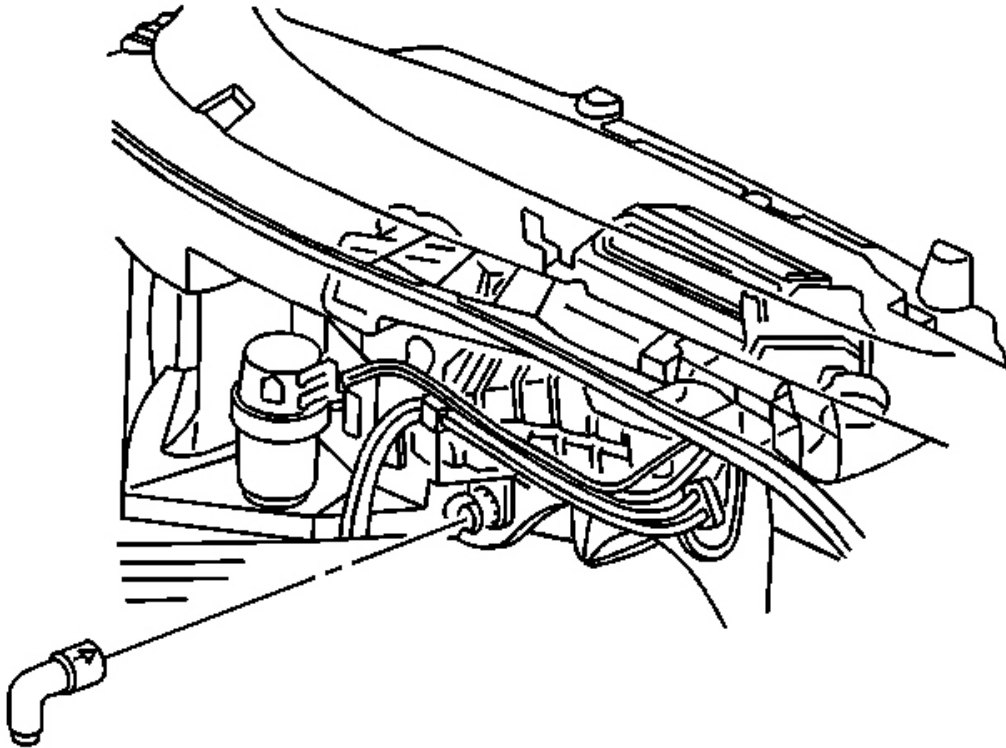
HVAC Module Drain Tube & I/P Upper Trim Pad
